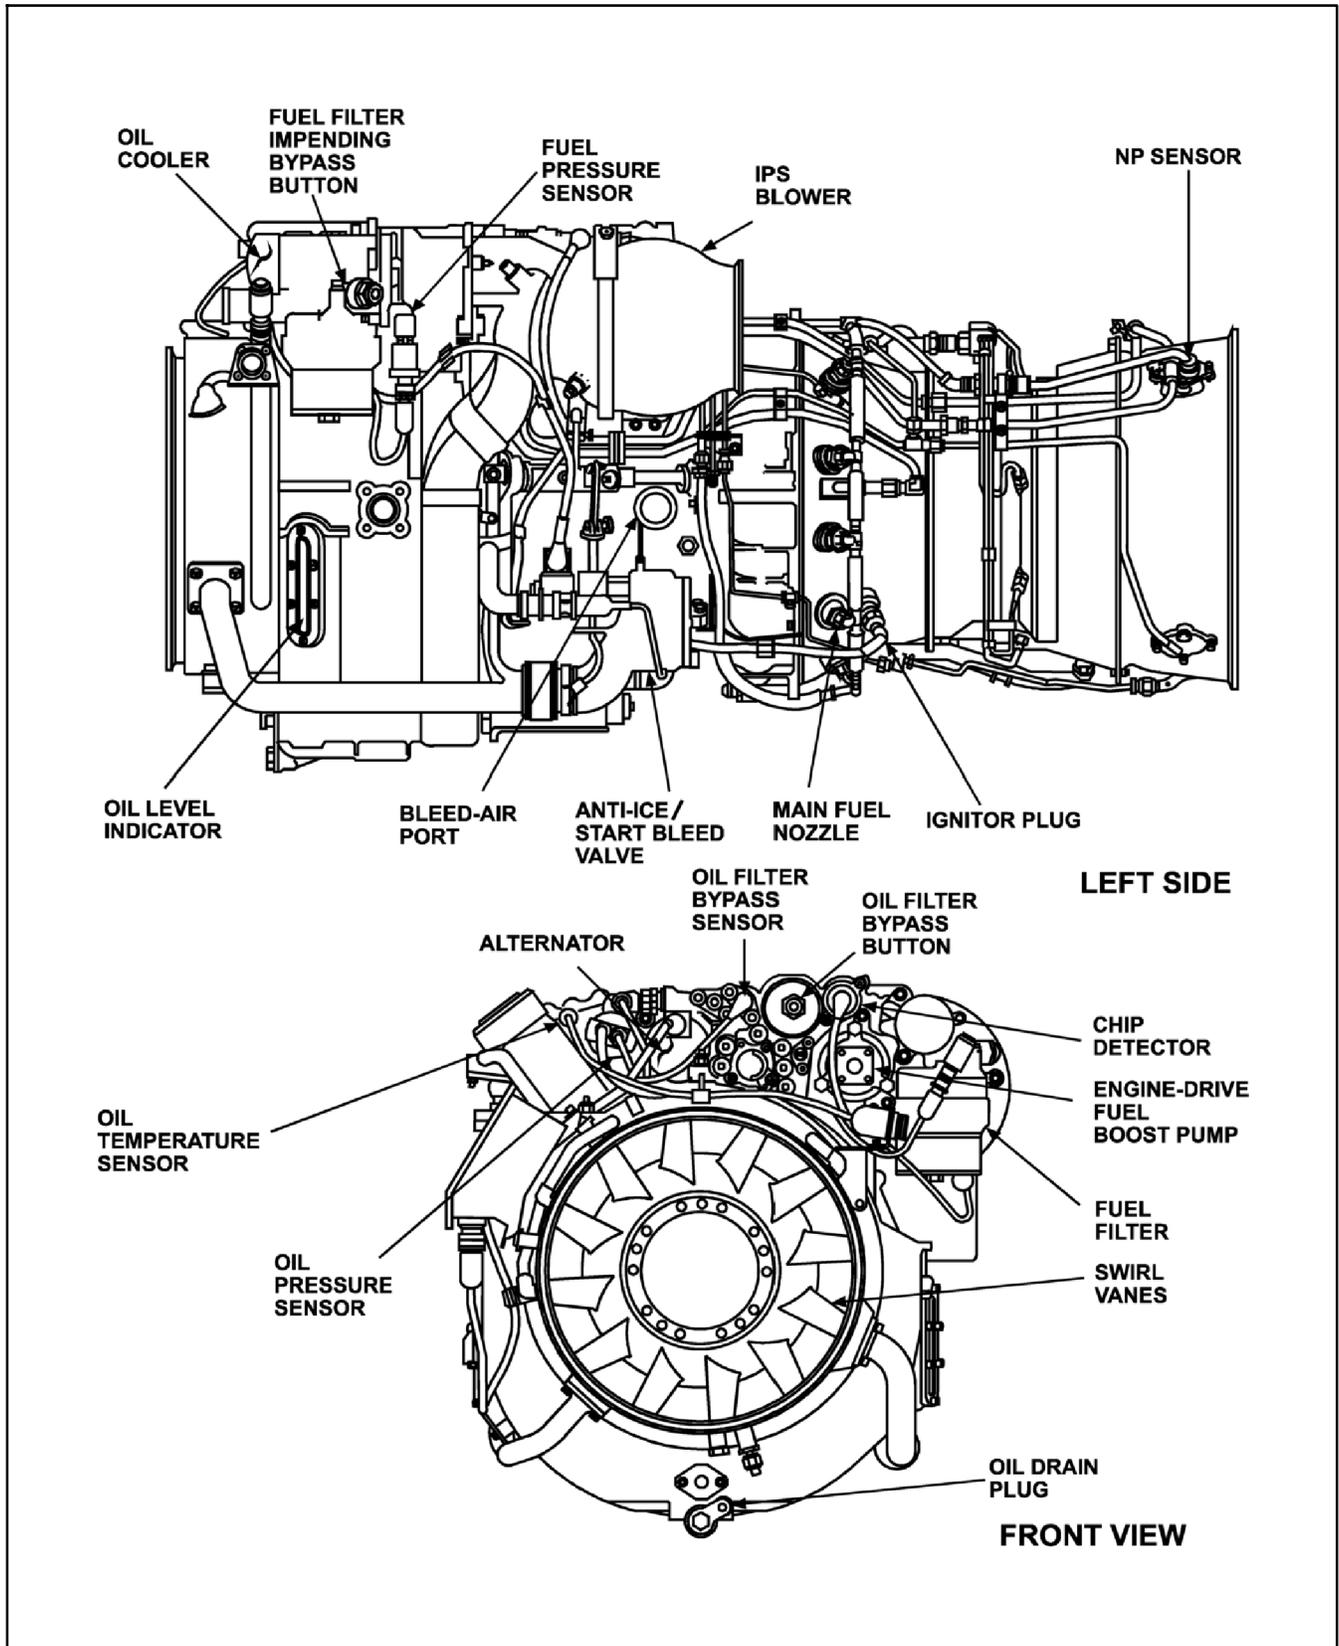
Engine, T700-GE-401C Profile (Sheet 1 of 3)
